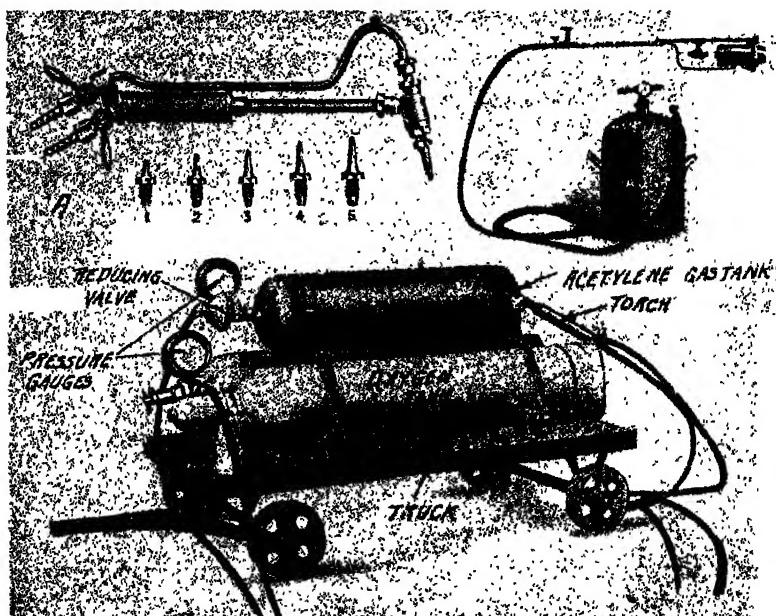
Torch for Autogenous Welding and Tips for Same at A. Pre-heating Torch at B. Portable Welding Outfit on Wheeled Truck Shown at Bottom of the Illustration.
